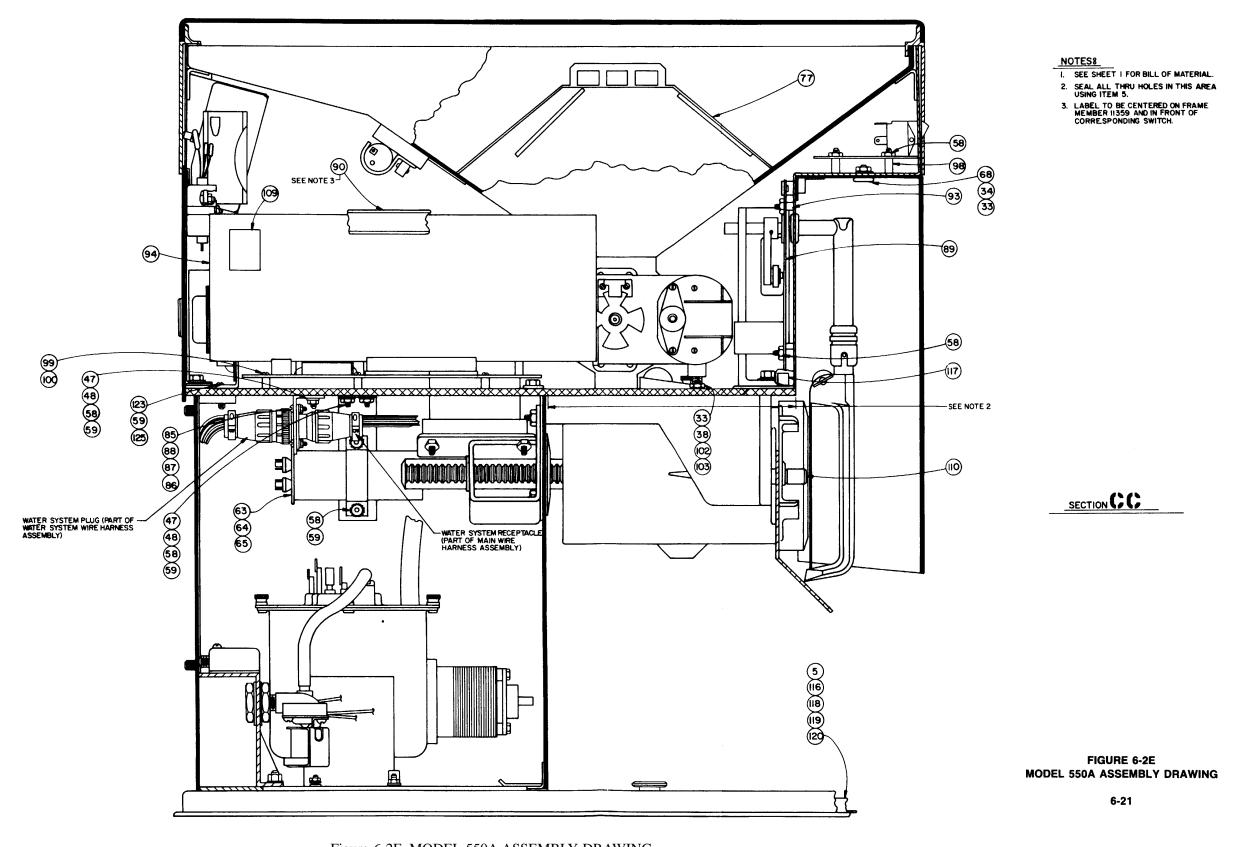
E MODEL 550A ASSEMBLY DRAWING
